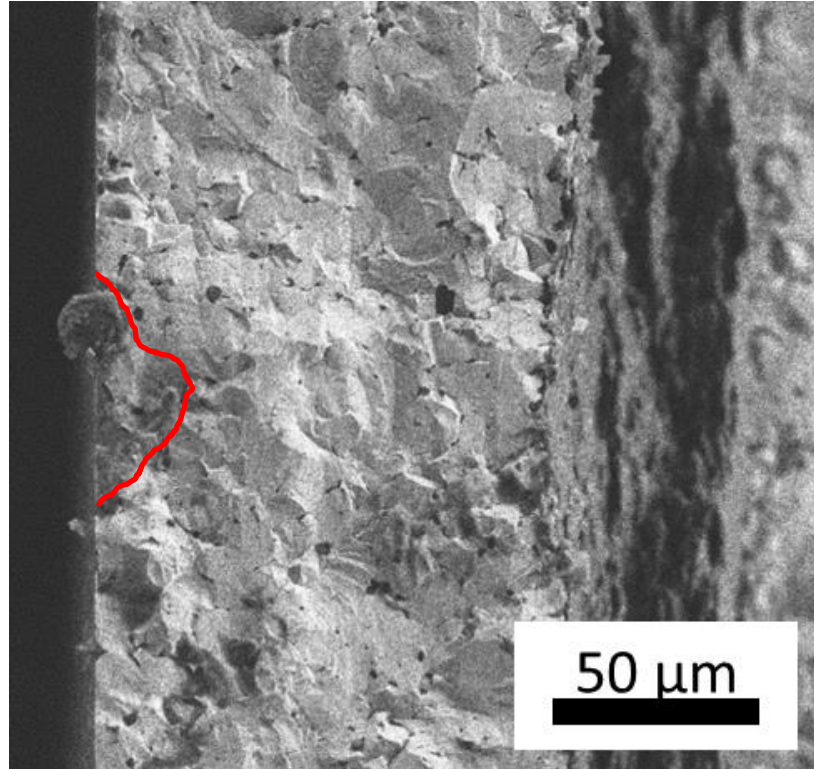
Fracture surface of a laminate specimen fractured at room temperature.
